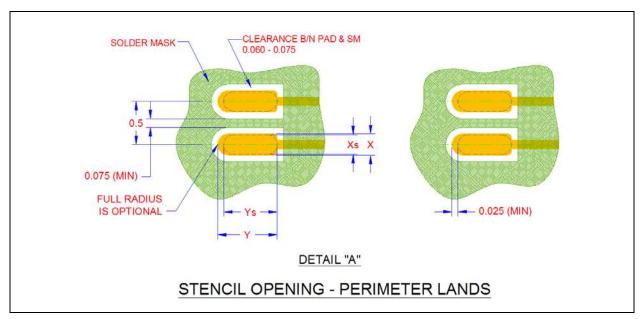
CAP1188 PCB Detail A - 24-Pin QFN 4mm x 4mm
